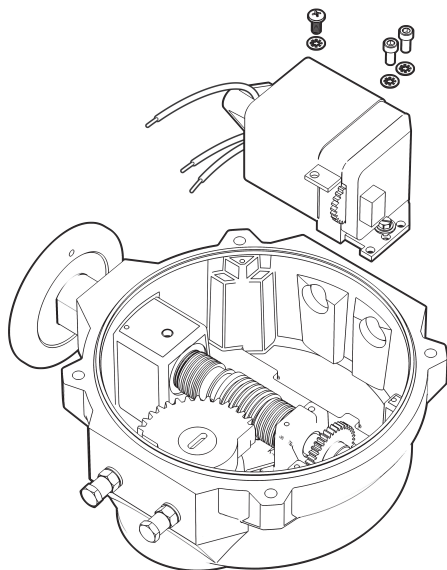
S70, Actuator Size E03, E06, E08 – switch plate exploded view.
